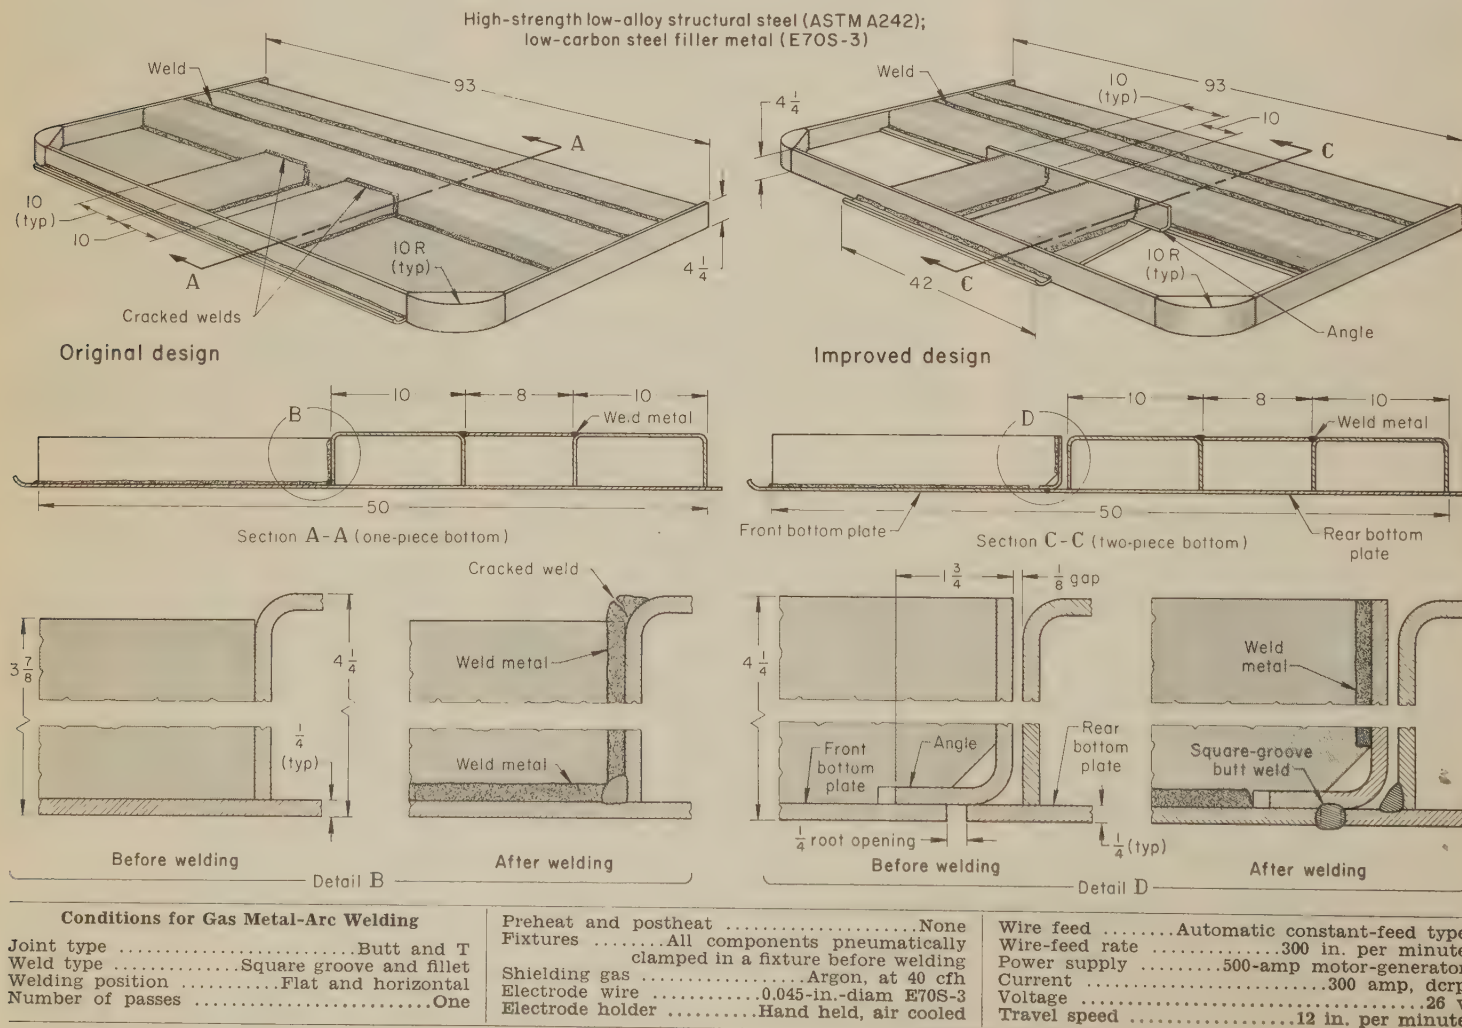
Semitrailer upper fifth wheel on which a design change provided less rigid construction, preventing weld failures (Example 197)
